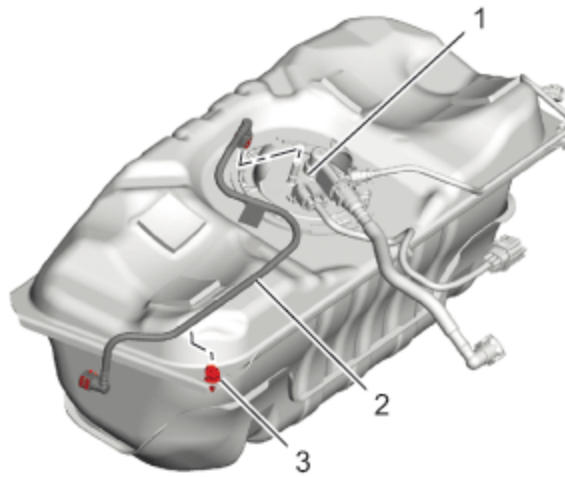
Fuel Tank Fuel Pump Module, Fuel Pump Fuel Feed Hose And Retainer
